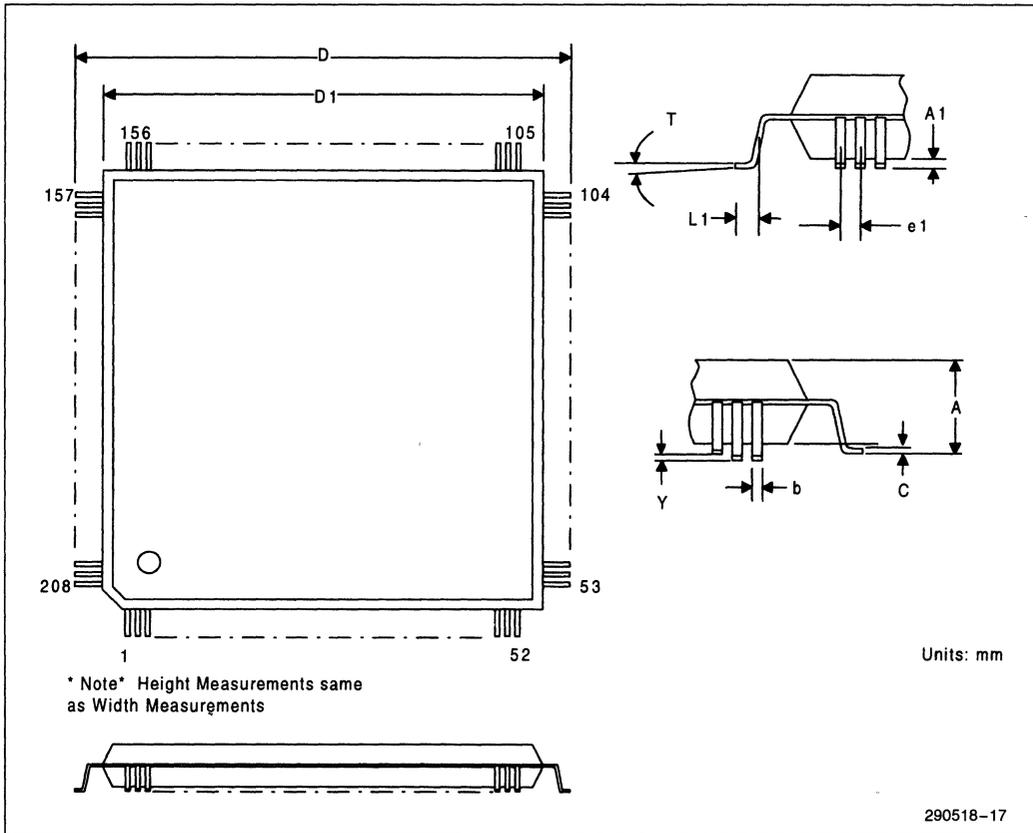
208 Pin Quad Flat Pack (QFP) Dimensions
